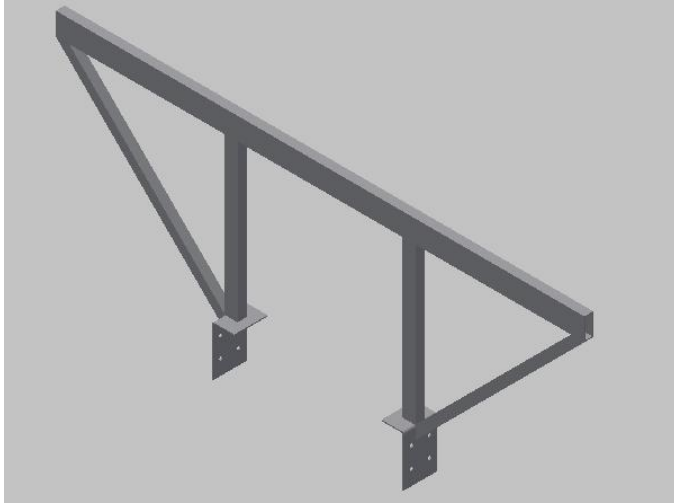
CAD model for a body cross member joined on the chassis mounting bracket
